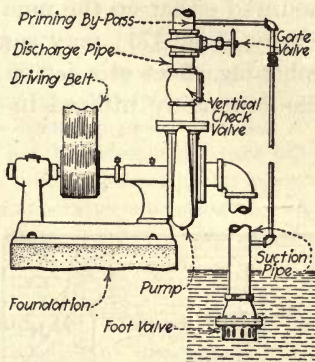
Showing How The Discharge Pipe Of A Centrifugal Pump Should Be Valved.
